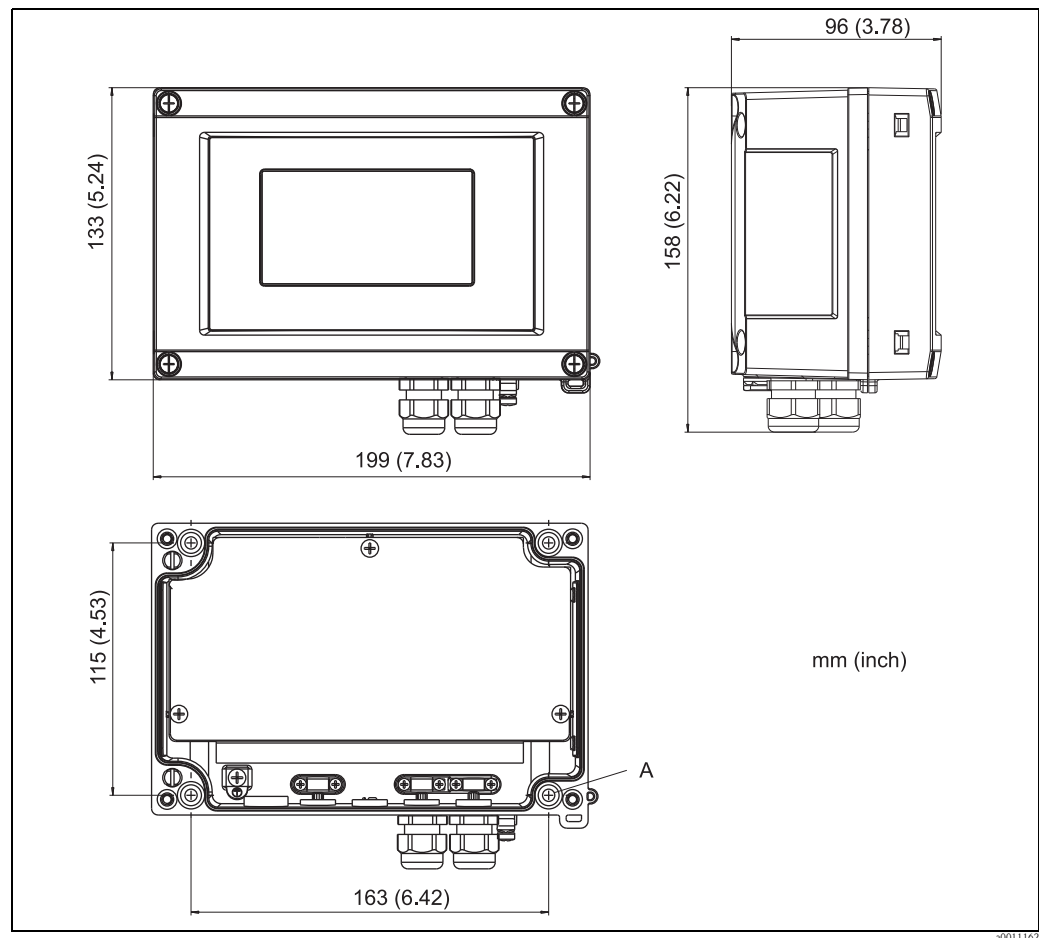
Installation dimensions; dimensions in mm (dimensions in inches in brackets)
